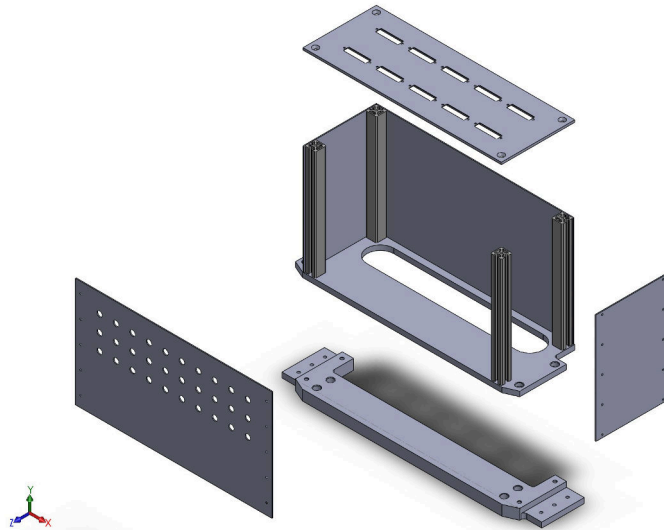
Exploded view of the Housekeeping box which shows the internal standoffs and the bottom plate. The model is shown in isometric projection.
